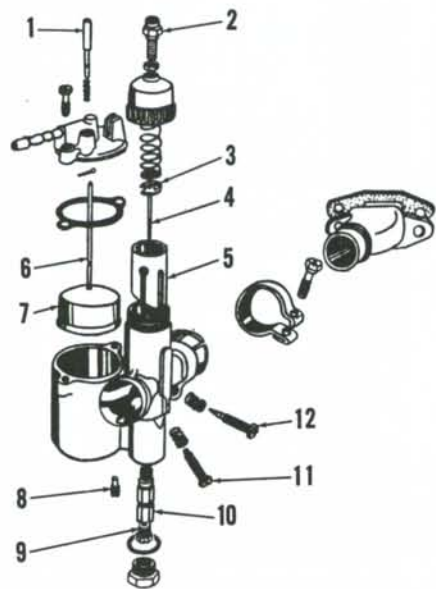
Exploded view of Fisher-Amal carburetor.
